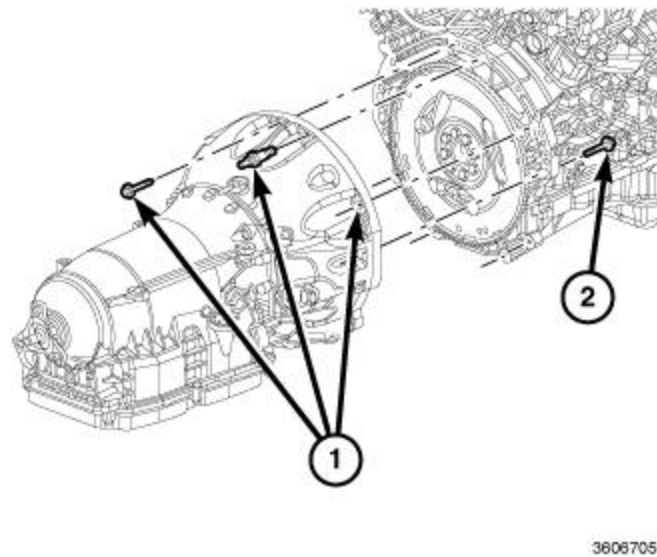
Remaining Bell Housing Bolts (RWD Shown: AWD Similar)
